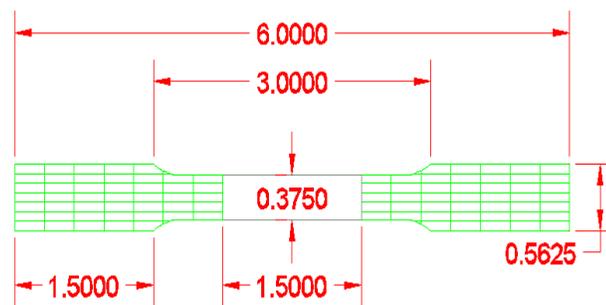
Dimensions of Coupon Specimen for tensile test.
